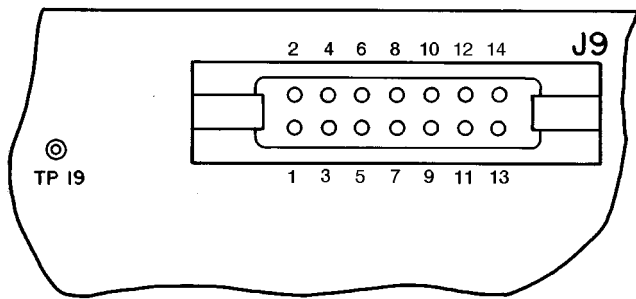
Relay Board Pin Terminal Connector (J9)
